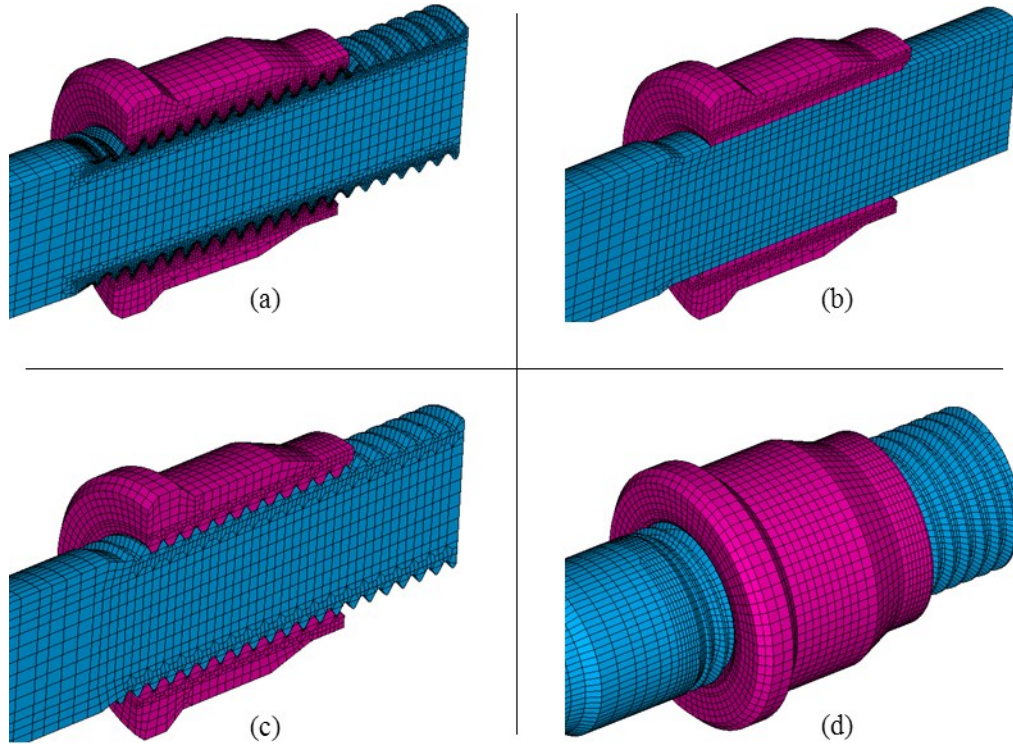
Thread Mesh Configurations – (a) Fine Thread Mesh, (b) Threads Not Explicitly Modeled, (c) Coarse Thread Mesh, (d) Helically Shaped Thread Mesh
